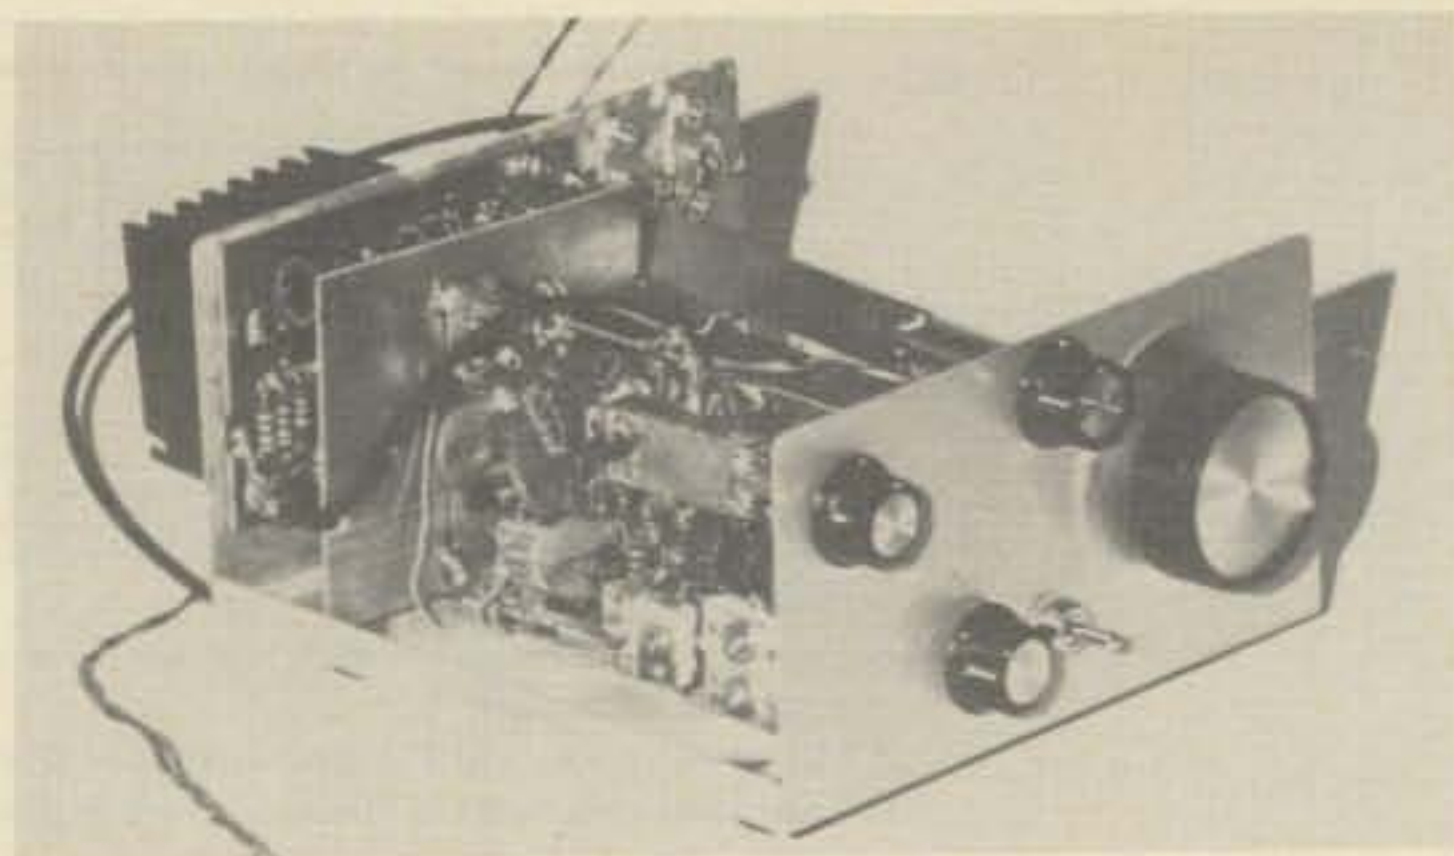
Once all boards and parts are mounted, the final step consists of cutting a shield partition from double-clad p.c. stock to fit behind the v.f.o.-exciter assembly, and to extend almost flush with the sides and top of the cabinet. An electrical contact with the sides and the top is not necessary. The shield is spot-soldered to the exciter board and v.f.o. enclosure, and the coax between the exciter and the final is run through a small rectangular space cut into the outer edge of the shield. The shield completes isolation of final amplifier from the remainder of the circuitry.
